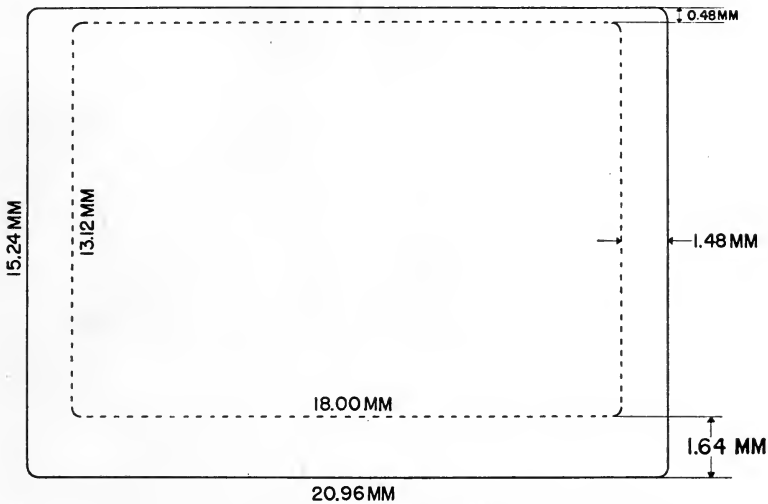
Reducing dimensions based upon SMPE recommended projector aperture dimensions.
